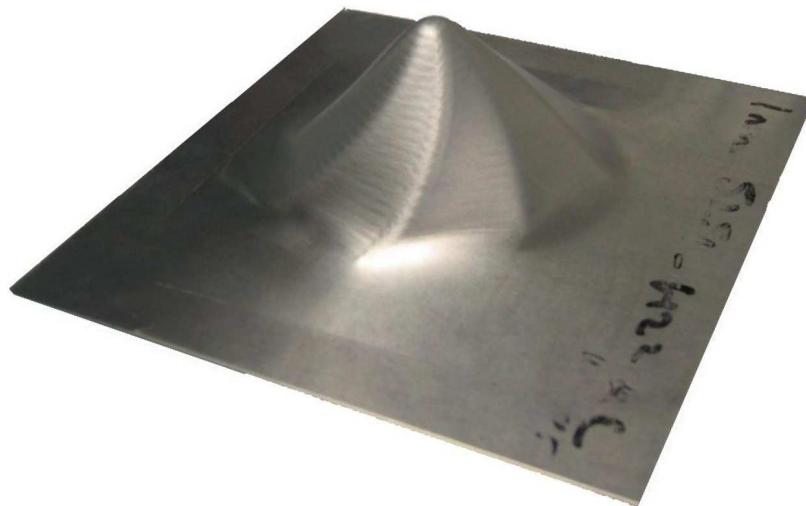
Photograph of 5251-H22 Al alloy test product formed on the Cambridge ISF machine.
